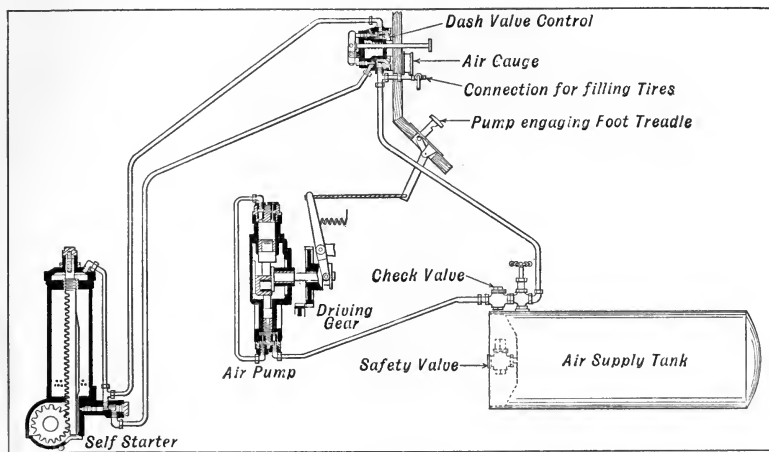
Never-Miss Starting System with Special Air Motor for Mechanical Cranking.
